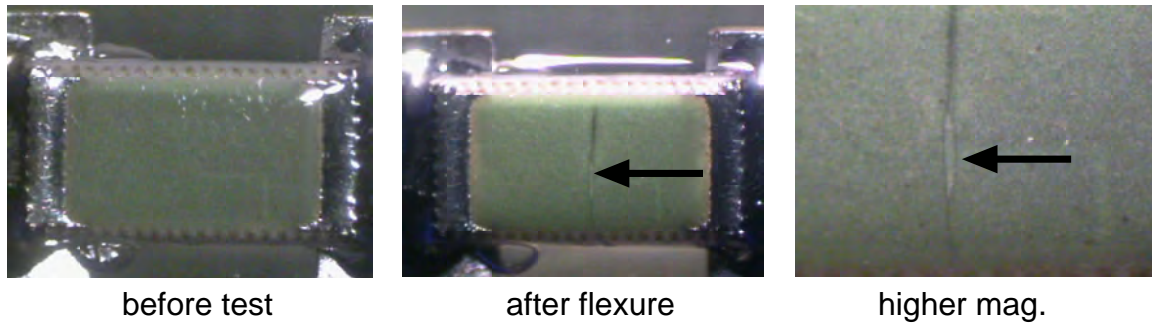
A coated, RM1206 resistor with spalling in the glass passivation adjacent to the fracture exposed to concave flexure.
